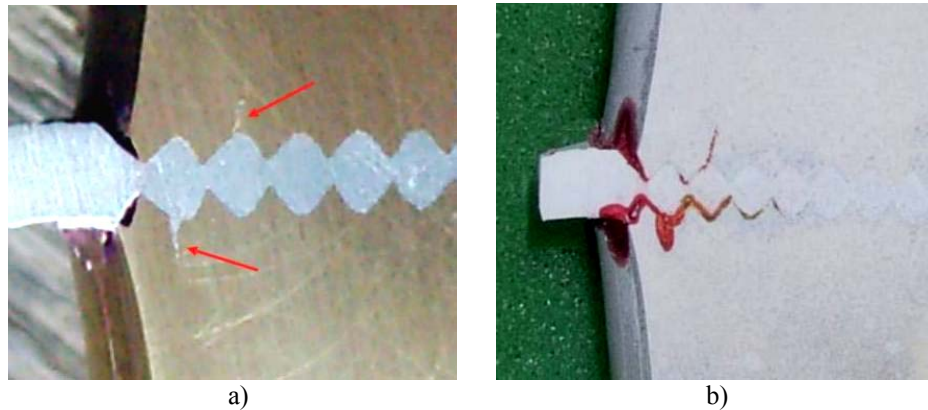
Cracks forming at the brass cogs base in case of exaggerate pressed cold-welded joint.
